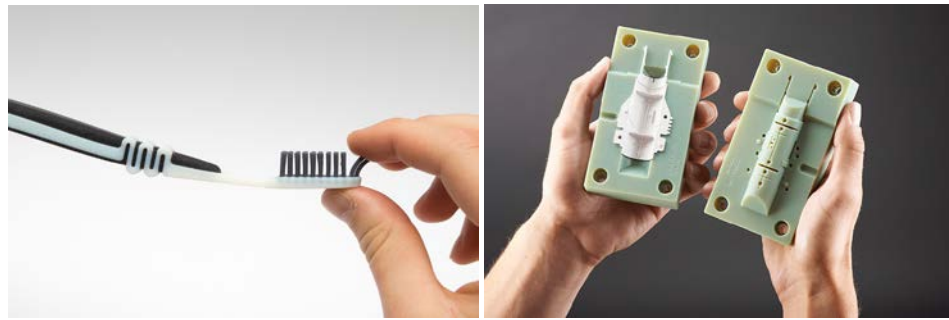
Left - examples of MJM technology fabricated parts combining different materials; Right - a prototype for injection molding (3D Hubs, n/d)
